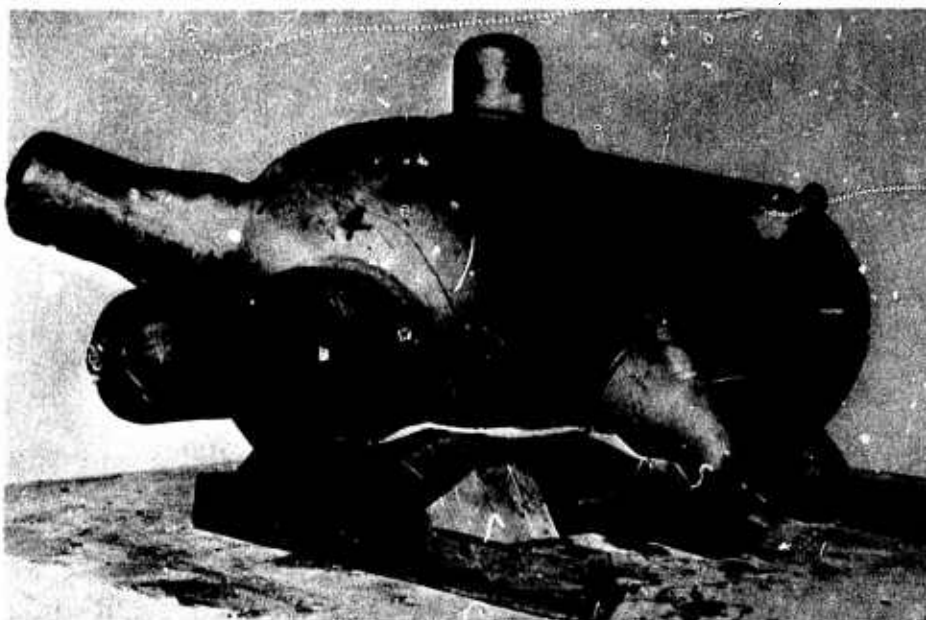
Failure conditions of a 3-ft-diam, low-cycle fatigue test vessel. The arrow indicates the location of the 6-in. fatigue crack which initiated the fracture.
